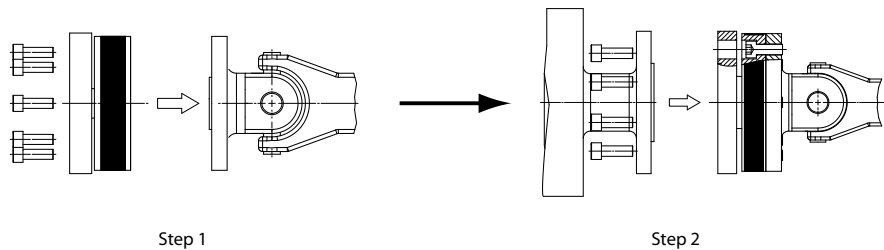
Example 2 mounting of TF 213 to TF 219 Sensors
